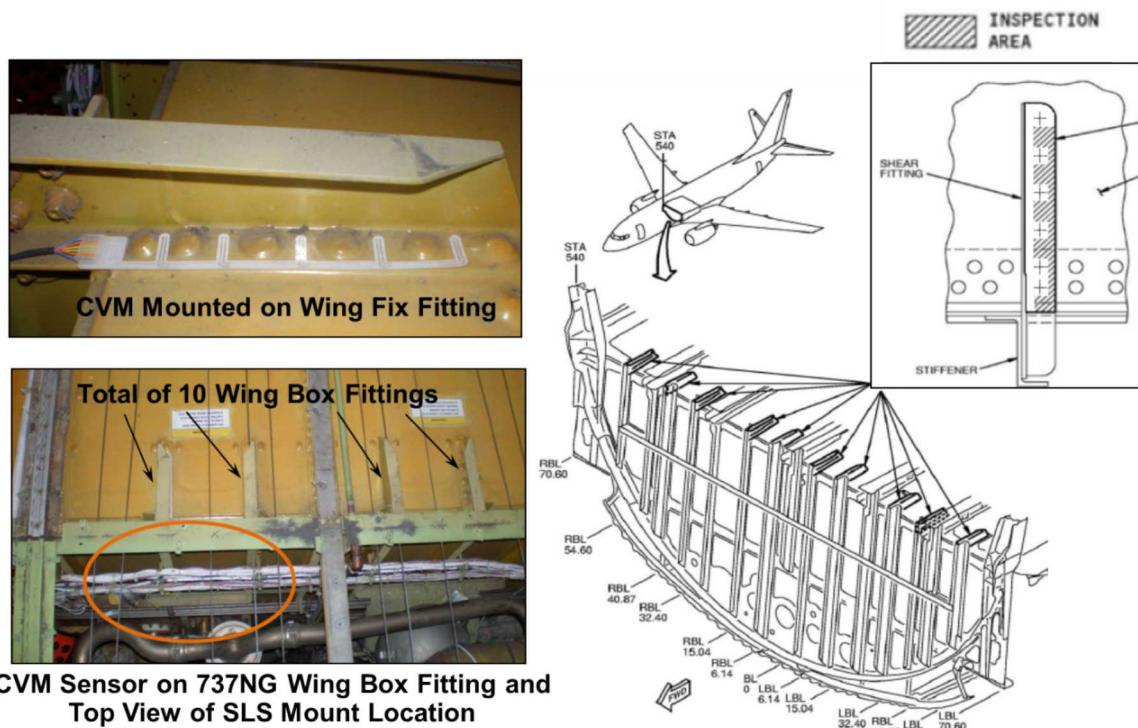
737 Wing Box Area – Location of Ten Fittings and CVM Sensor to Monitor for Cracks in the Inspection Area Highlighted
